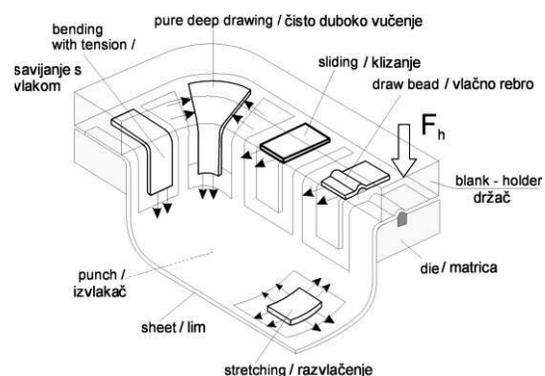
Scheme of physical models at deep drawing of complex geometry parts
